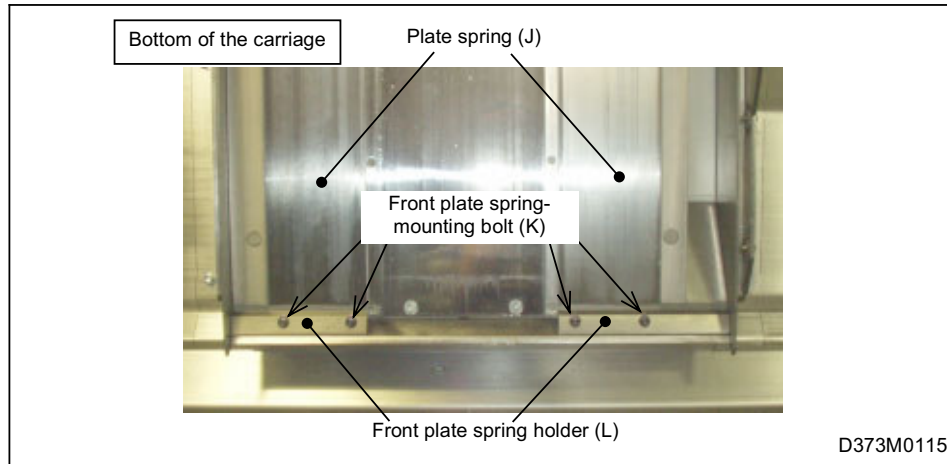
X-axis plate spring replacement procedure (3/5)
